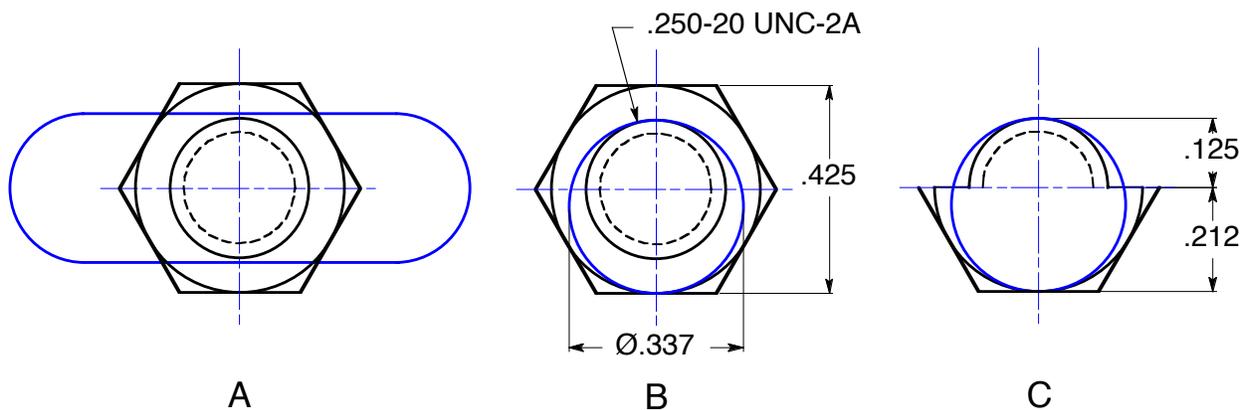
Floating fastener dimension and tolerances
